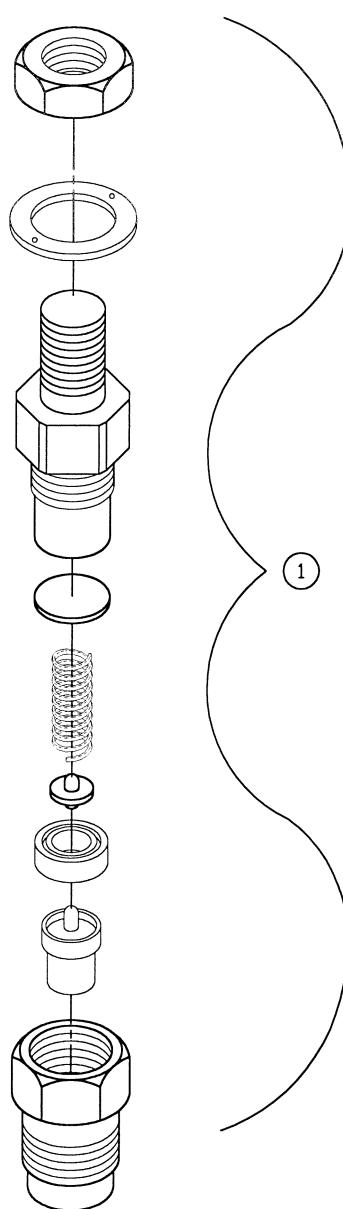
Nozzle Holder (Component Parts), Engine Group
